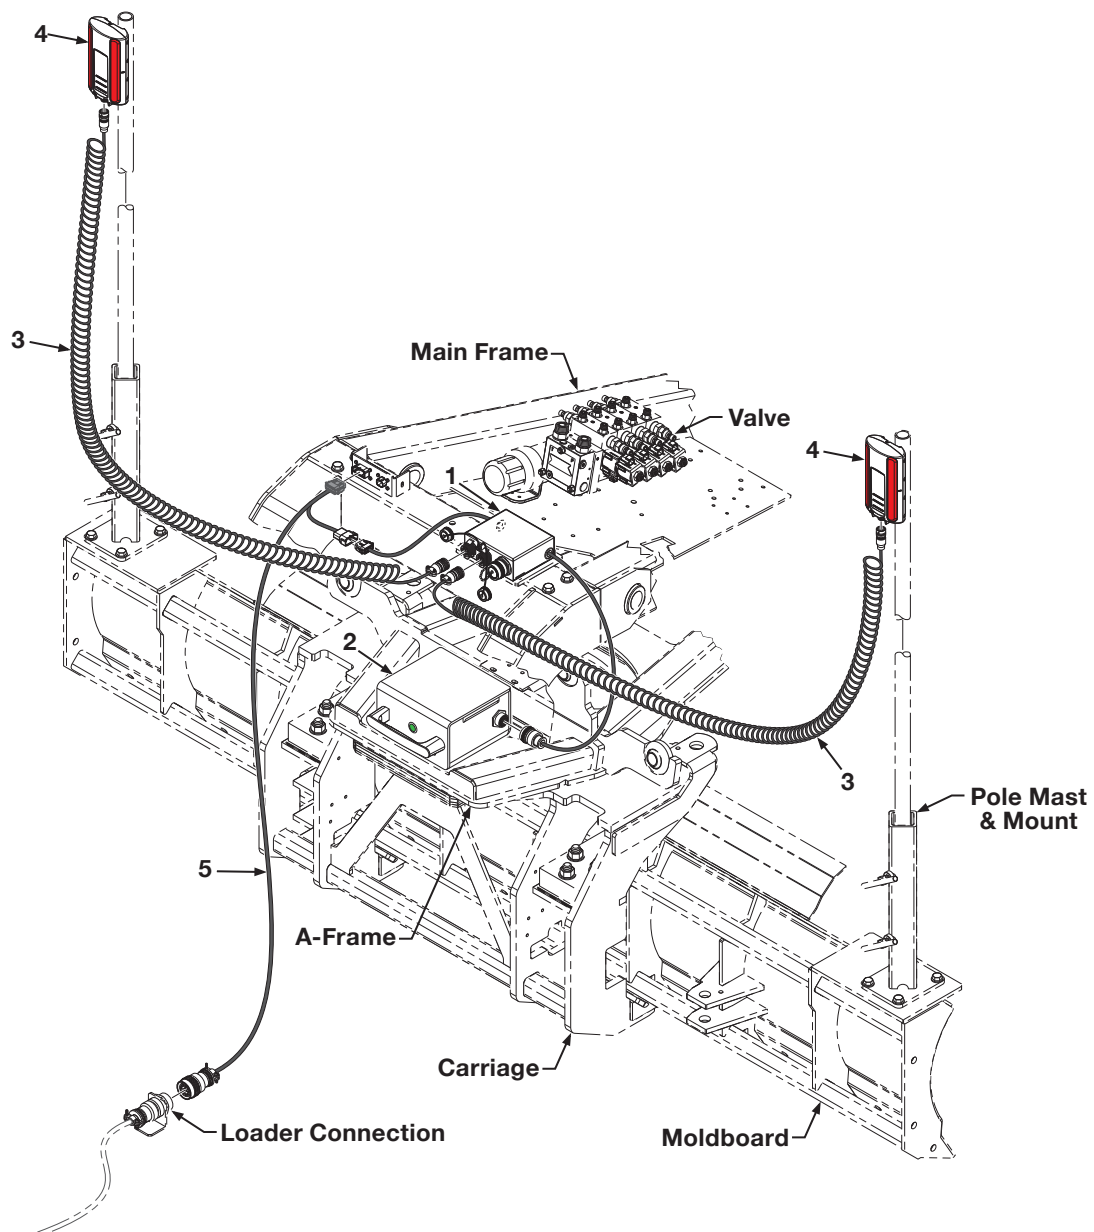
Laser Controls and Related Parts - Trimble Earthworks Go!
